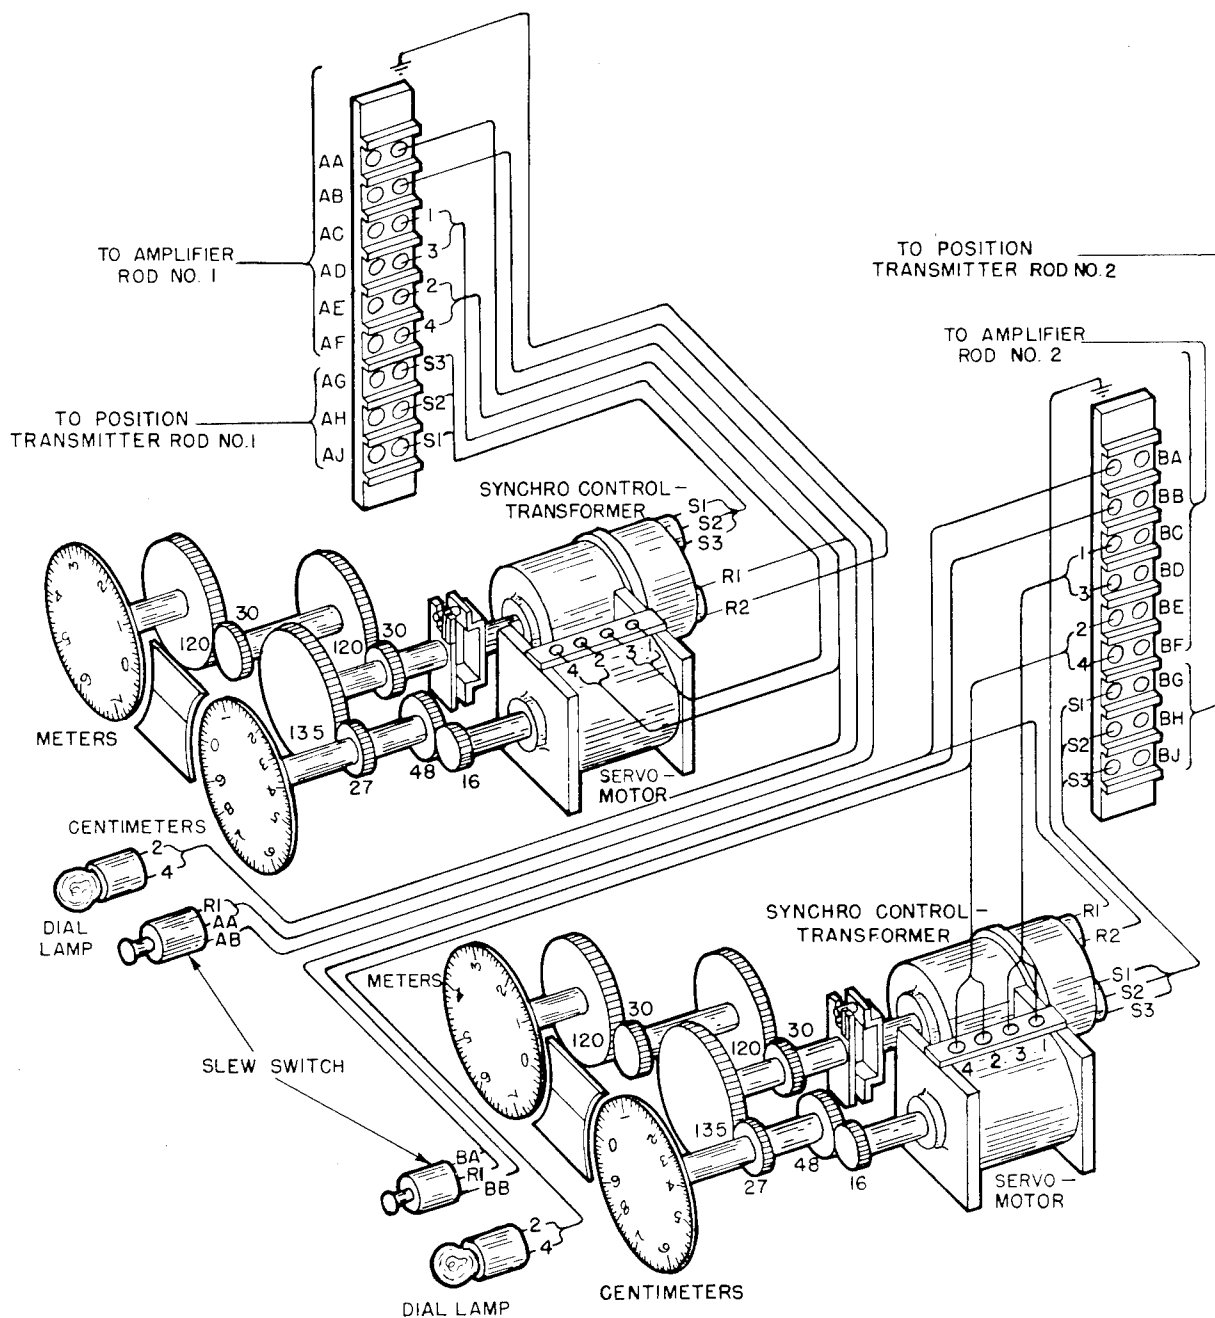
EMERGENCY-ROD POSITION INDICATING UNIT-RODS NO. 1 AND NO. 2
